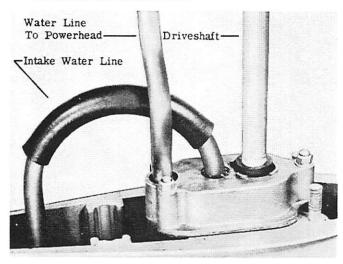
Water Pump Cover Assembly Mounted with Waterlines Installed
